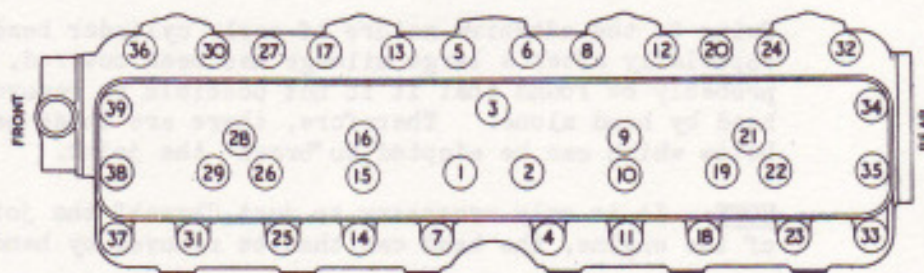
ORDER IN WHICH THE CYLINDER HEAD NUTS SHOULD BE TIGHTENED.
